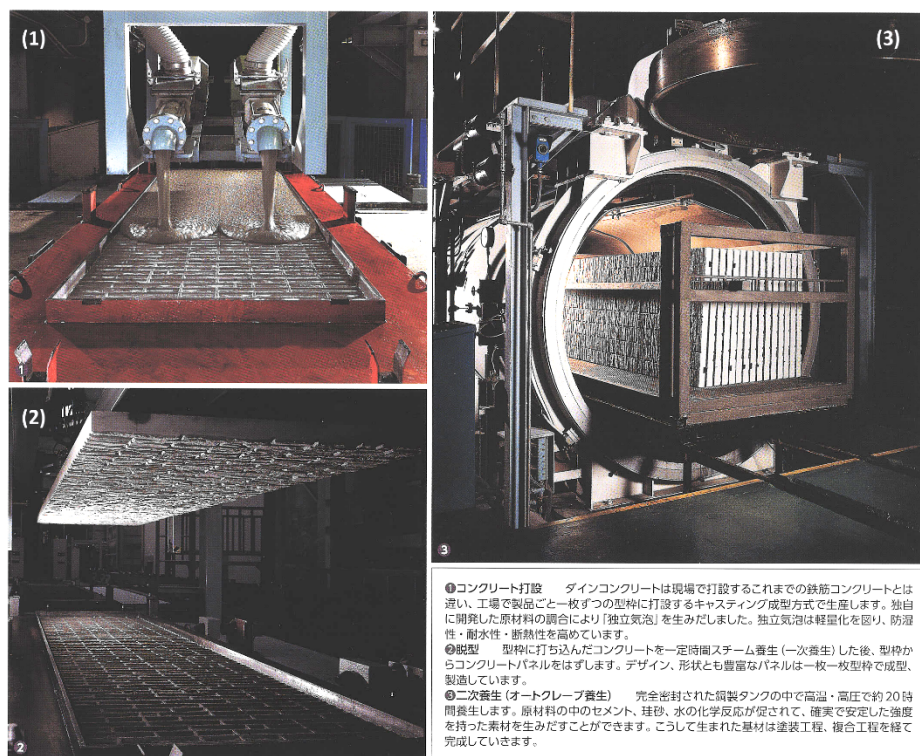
Sekisui House's concrete wall-panelling production (From material collected in the visit to Sekisui House in May 2017).
